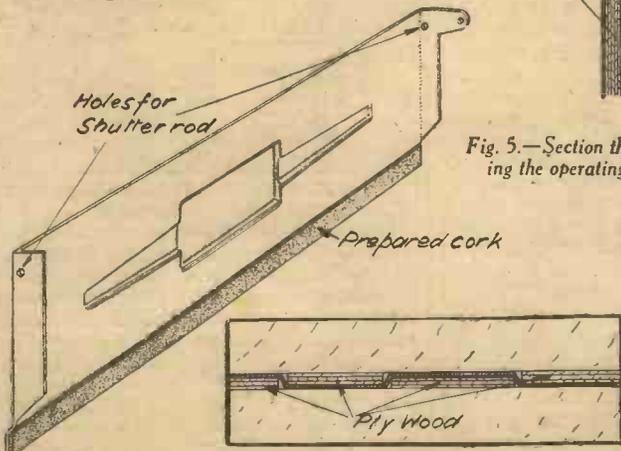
(left).—A completed shutter. Fig. 3 (right).—Section of a wooden former for shaping the embossed shutters.
